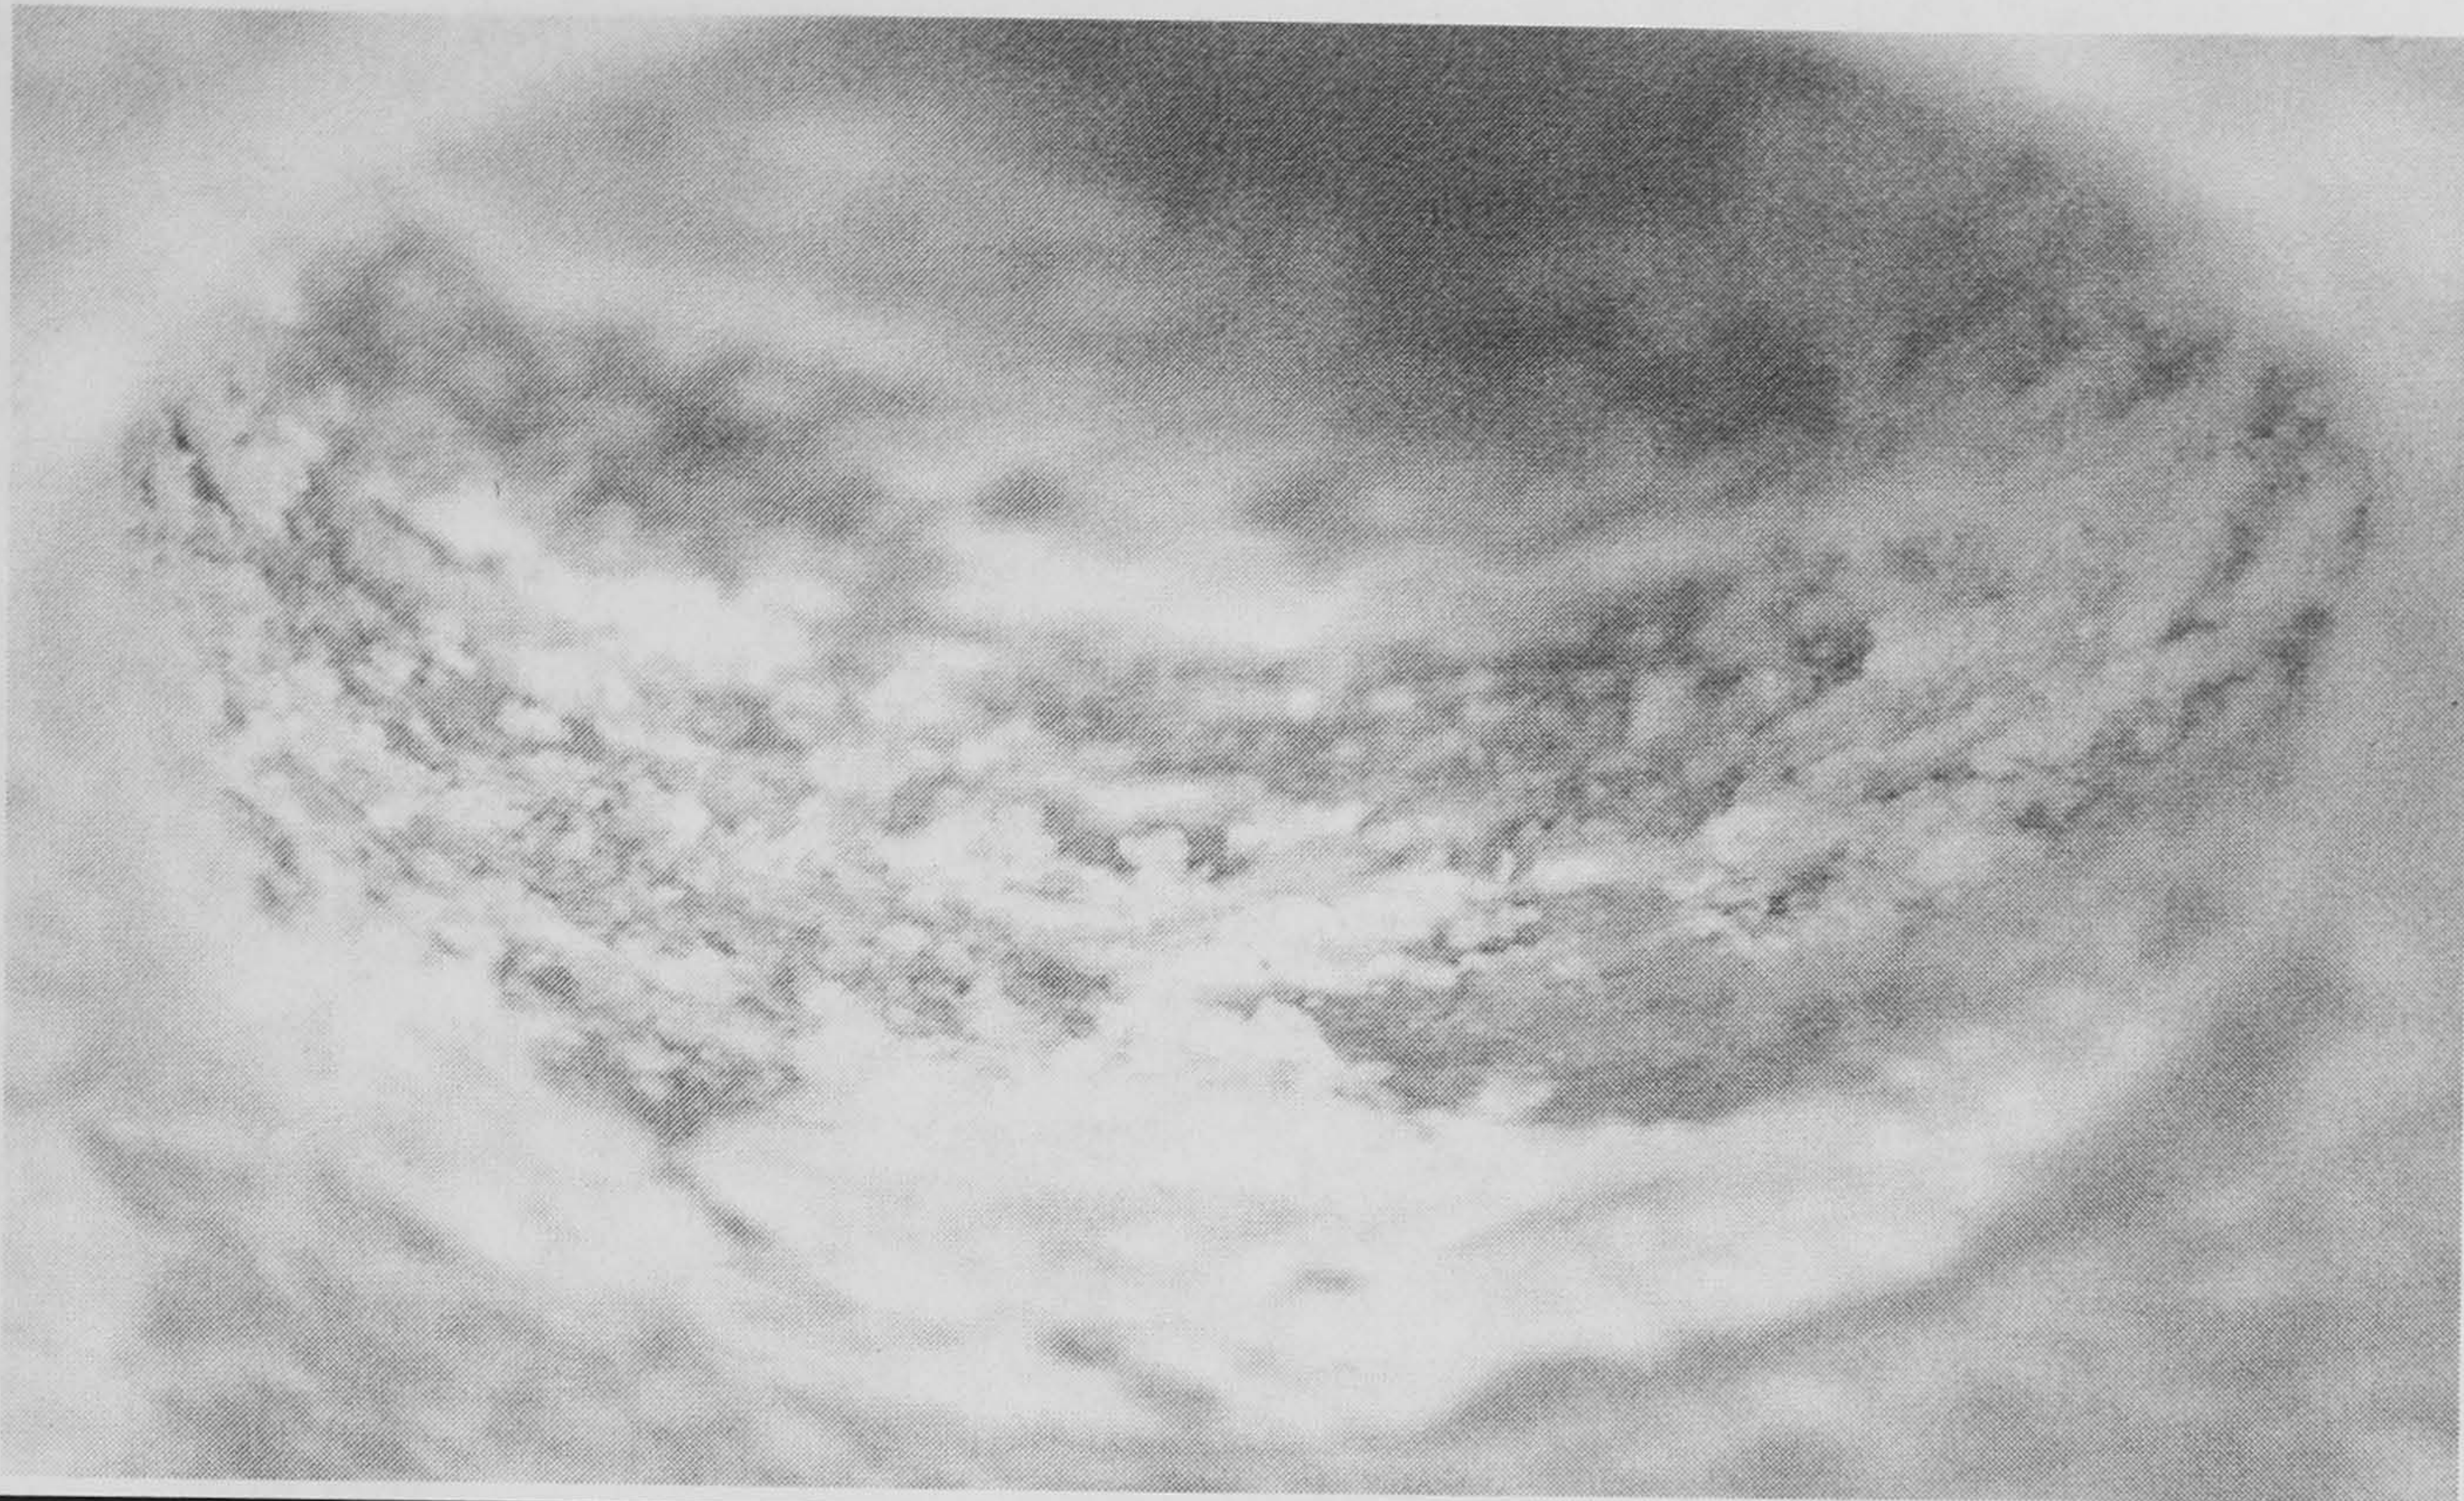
shows the corrosion product inside the hole surface for specimen 13.
